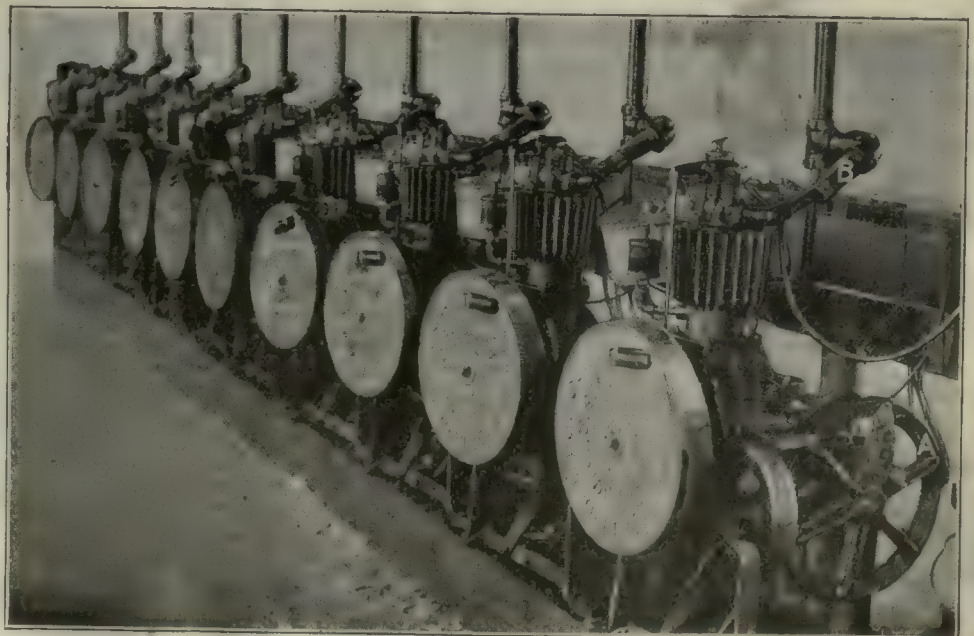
METHOD OF TESTING GROUPS OF ENGINES
